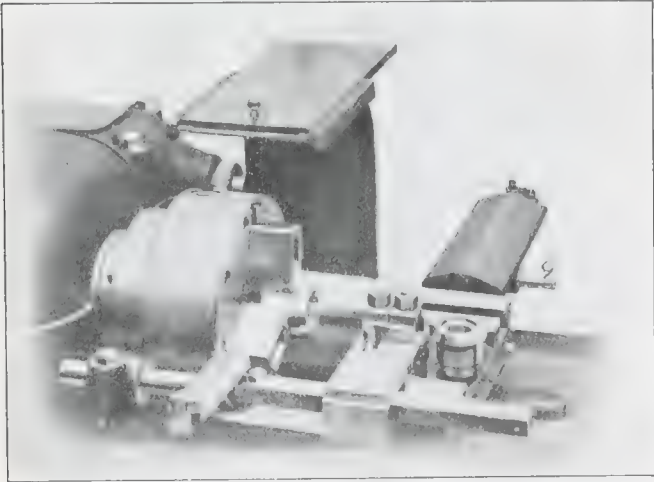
TAPER TURNING AND CHASING ATTACHMENT
